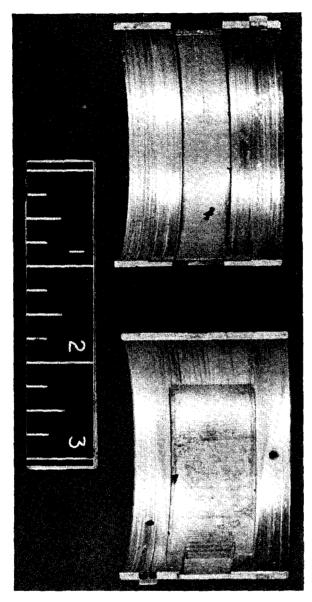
Worn turbine free end bearing (point A) from Allen 750 kW turboalternator
